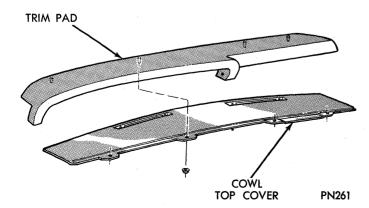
Cowl Top Cover and Trim Pad H and N Models
